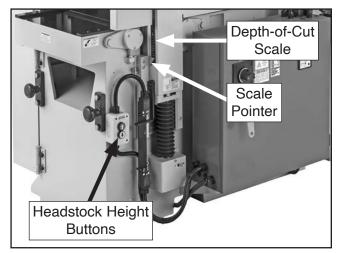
Depth-of-cut controls for upper cutterhead at rear of machine.
